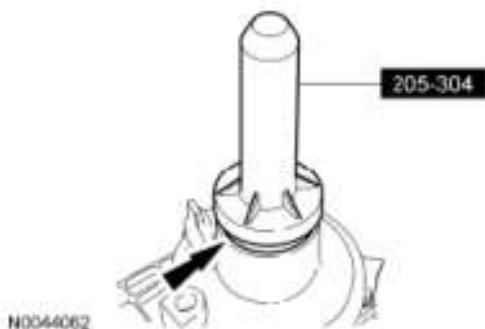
Installing Oil Seal Using Drive Pinion Oil Seal Installer
